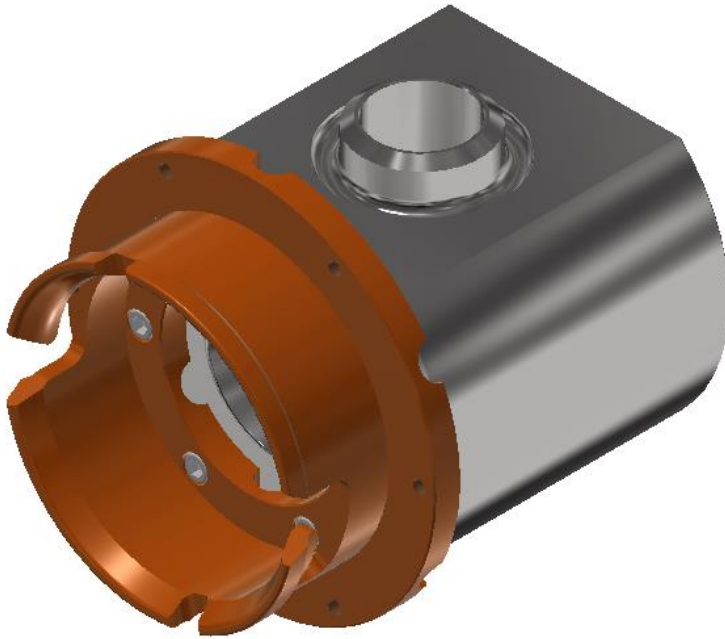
Typical Ø100 Single Port Receptacle with J-Lock Interface and Weld Neck
